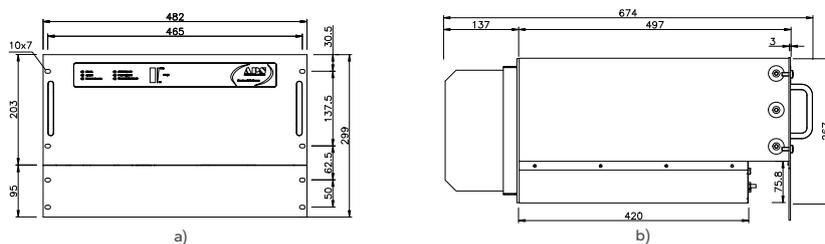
Views with dimensions of the MP PBI type rectifier module in the M3-MP enclosure:
